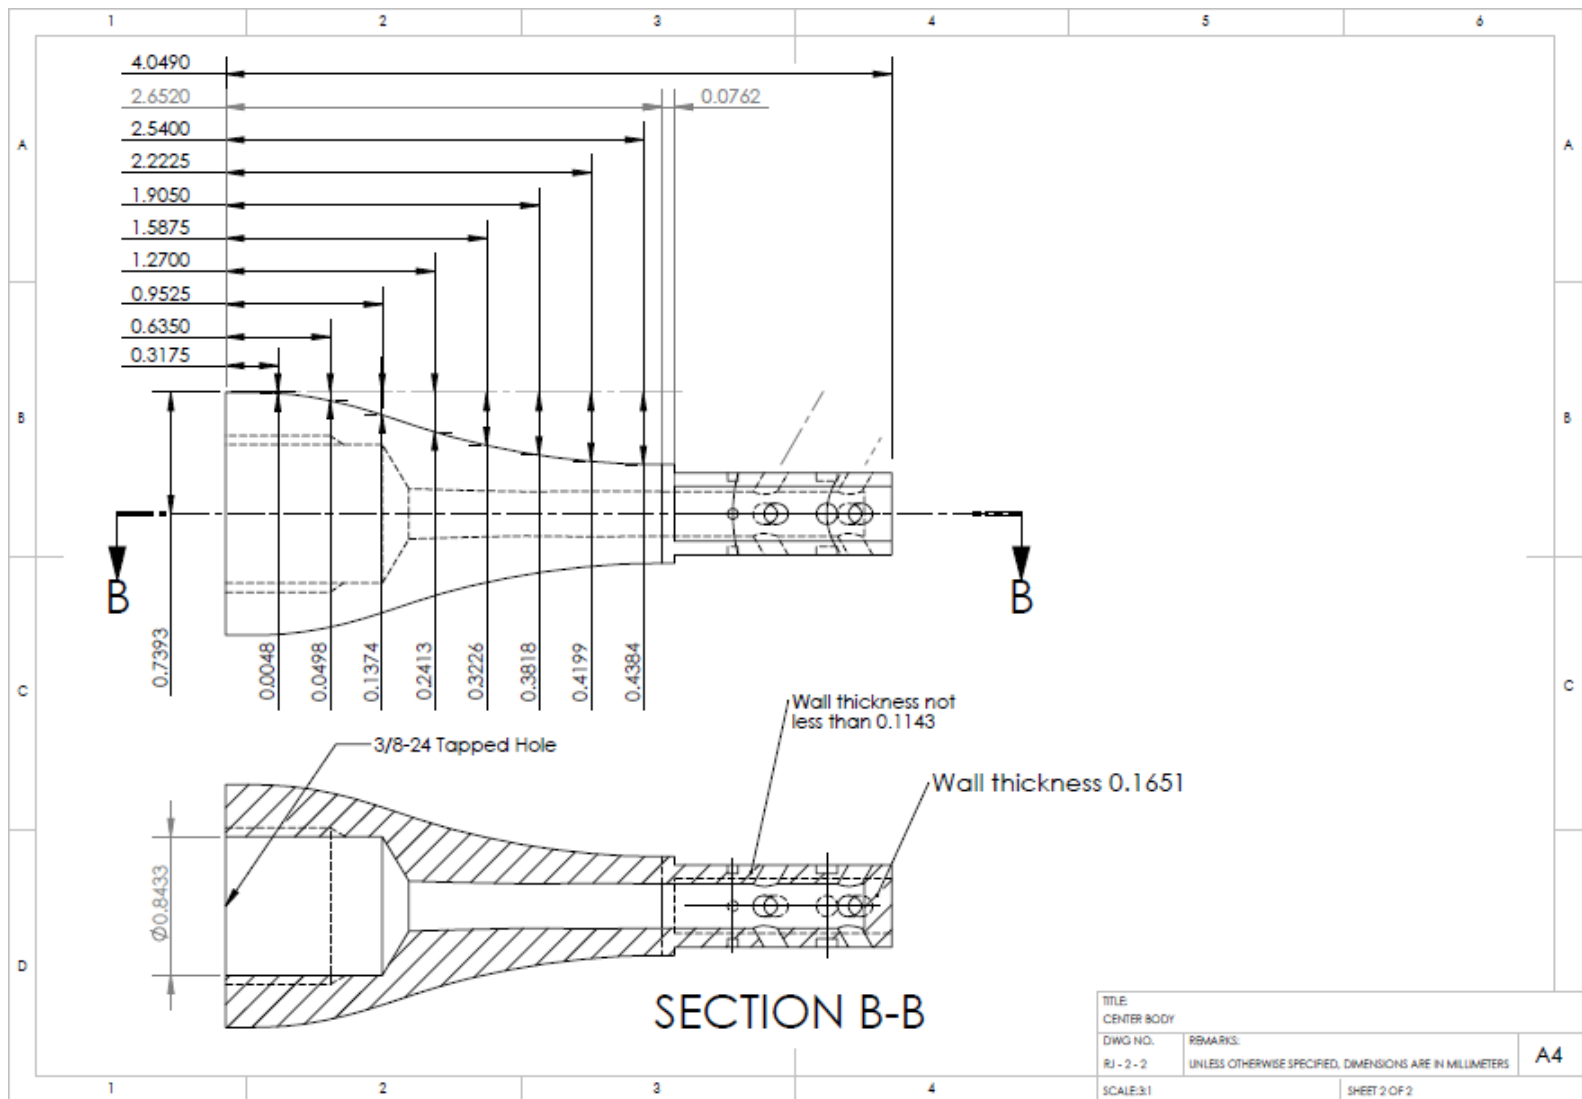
Part drawing: Contour of ramjet center body (RJ – 2 – 2)
